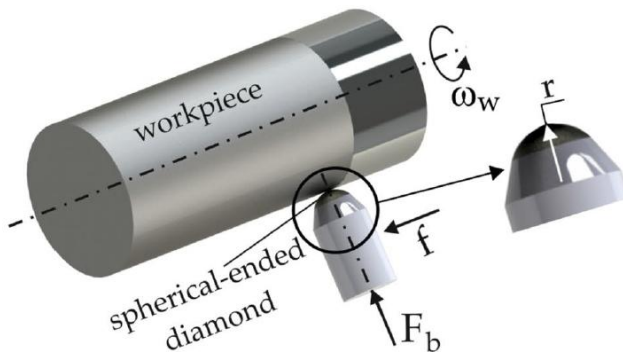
Scheme of burnishing process on external cylindrical surface [8]
